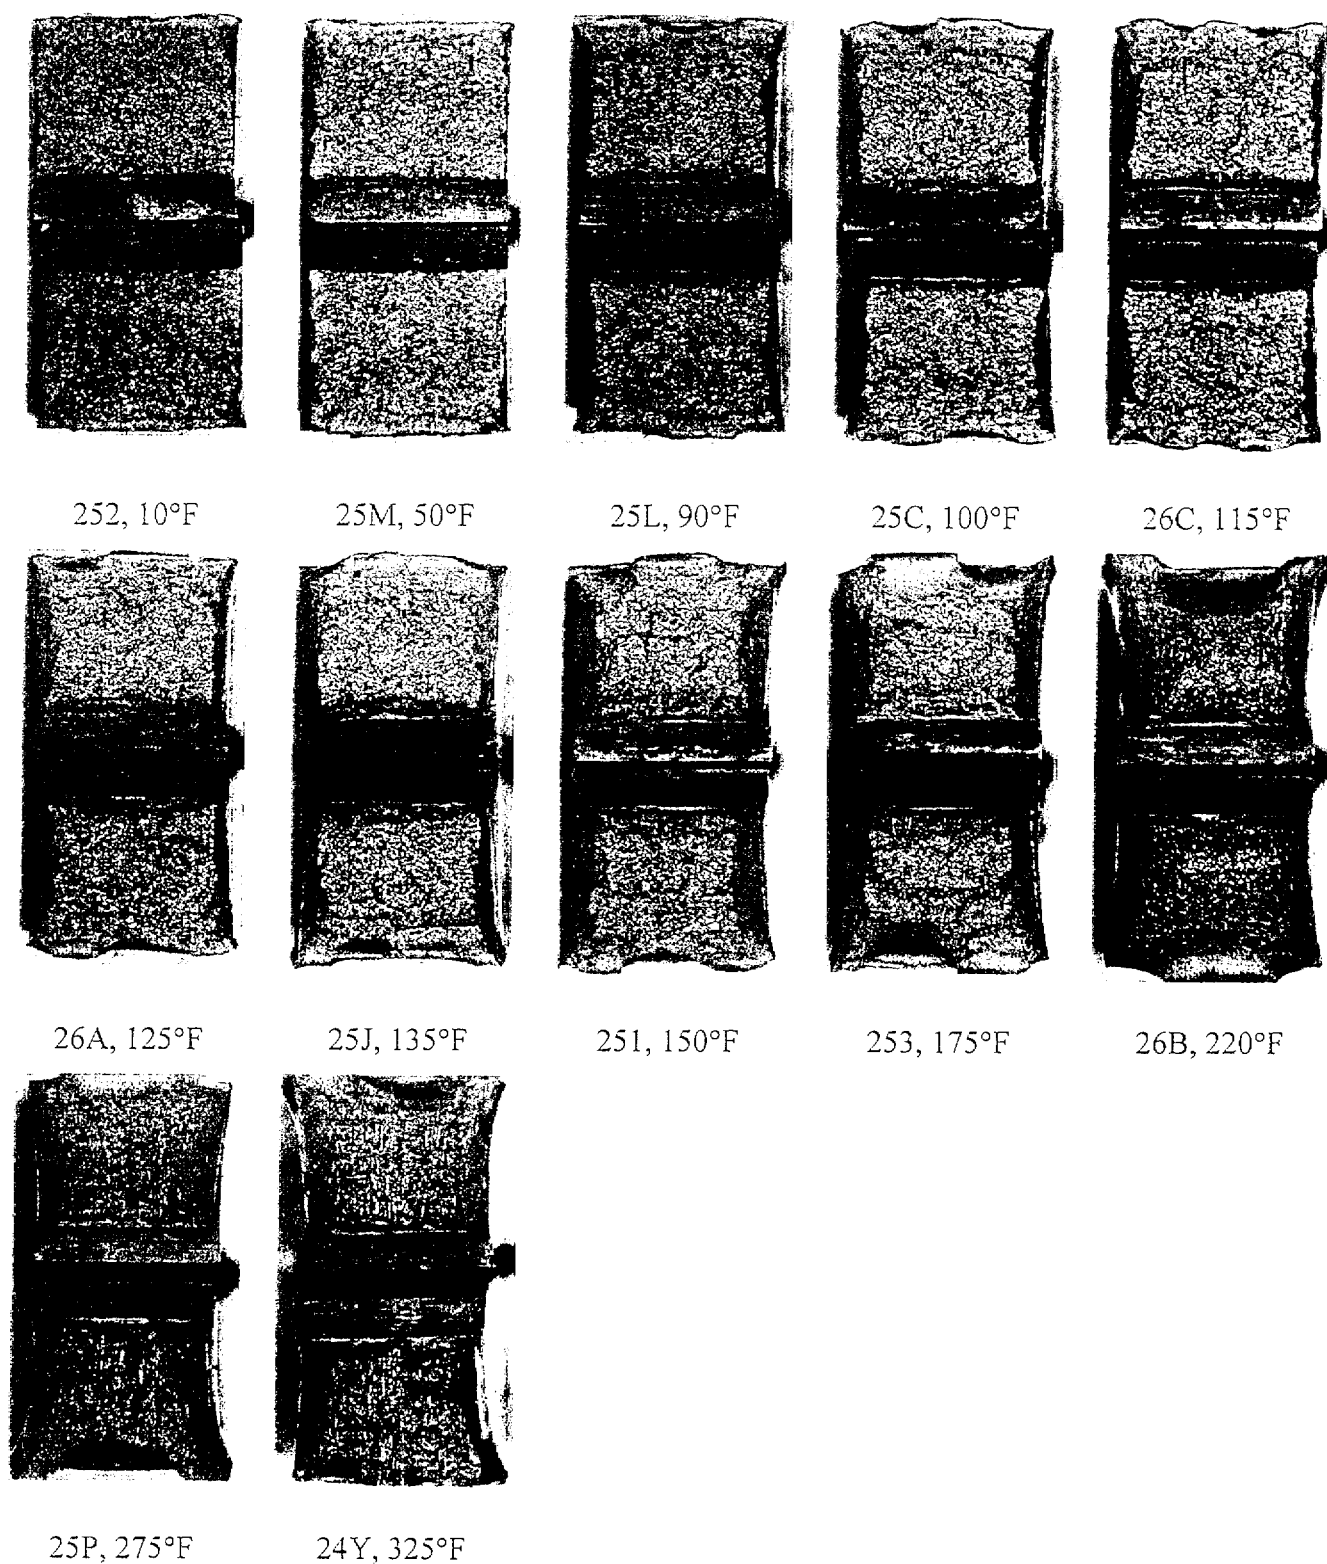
Charpy Impact Specimen Fracture Surfaces for St. Lucie Unit 1 Reactor Vessel Lower Shell Plate C-8-2 (Transverse Orientation)
